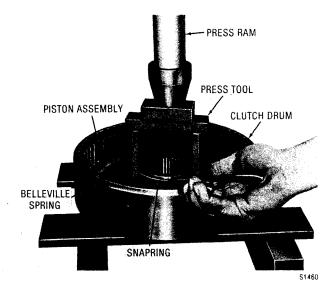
Removing (or installing) piston return spring (typical configuration)
